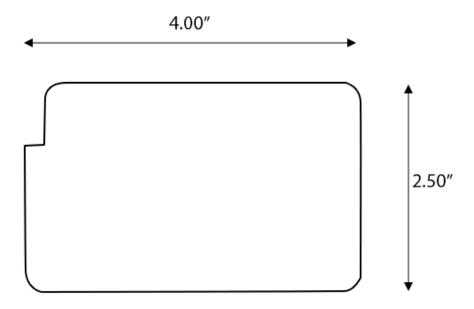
BeagleBone LCD3 Cape Dimensions Drawing
